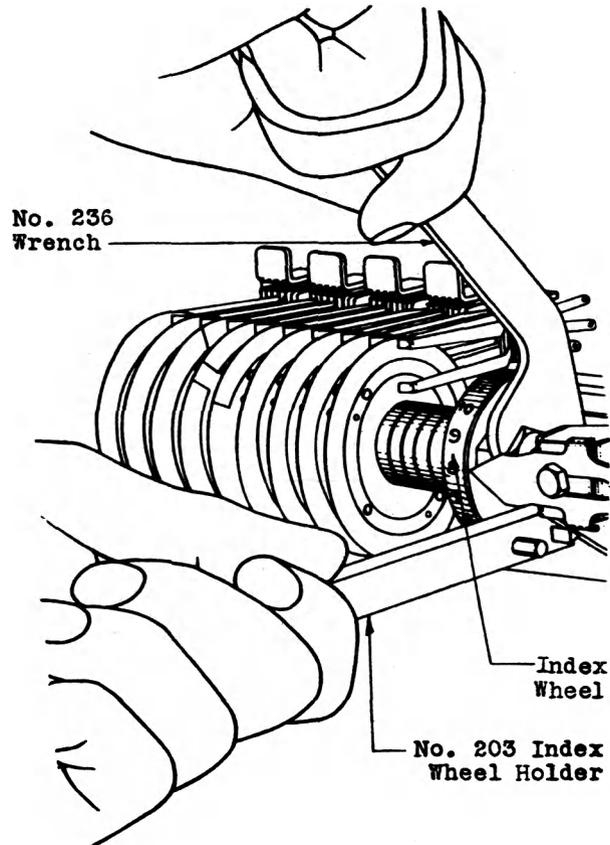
Method of Loosening the Clamping Nut of the Cam Shaft Assembly
